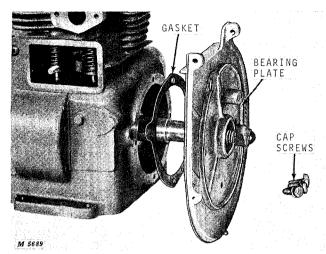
Installing Bearing Plate with Bearing on Cylinder Block
